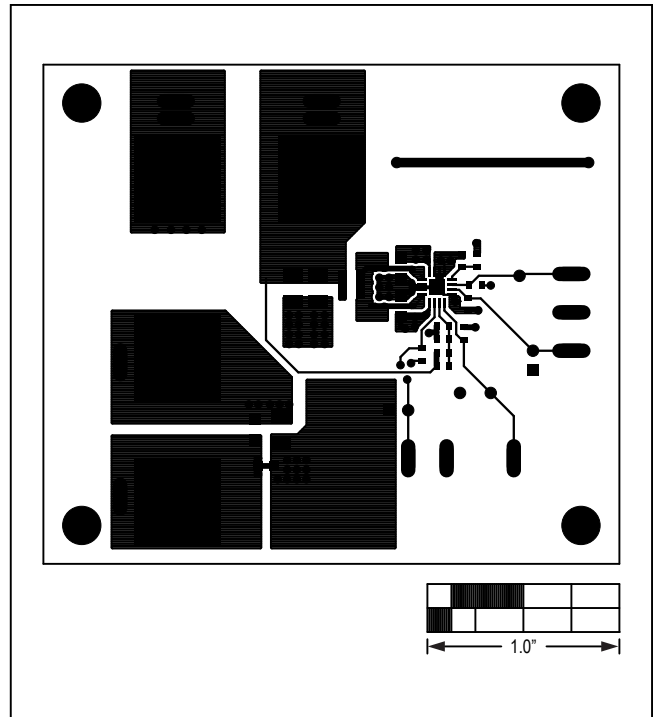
MAX16962R EV Kit PCB Layout—Component Side
